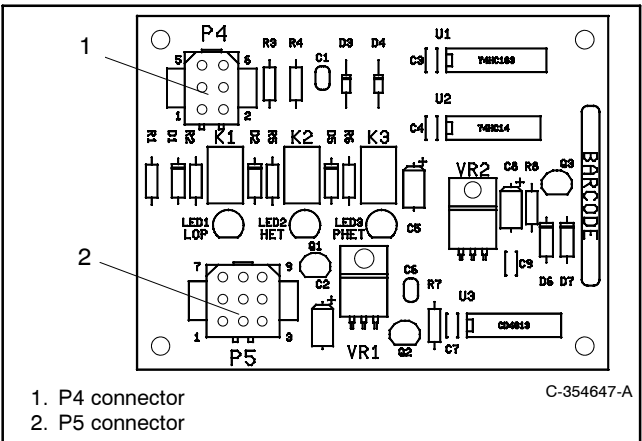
Pulse Converter Circuit Board Mounting in 550 Controller (top view)
